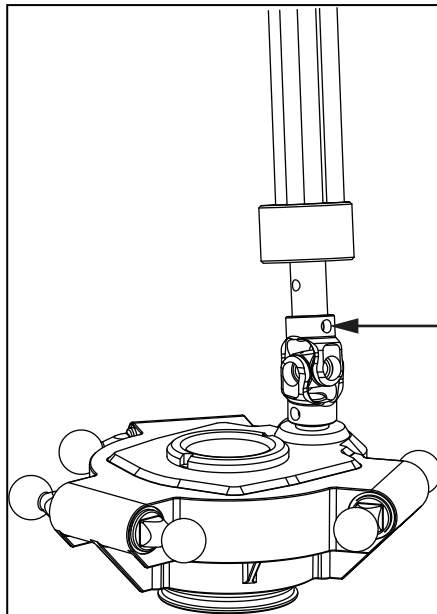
Remove Lower U-joint Drive Shaft Set Screw
